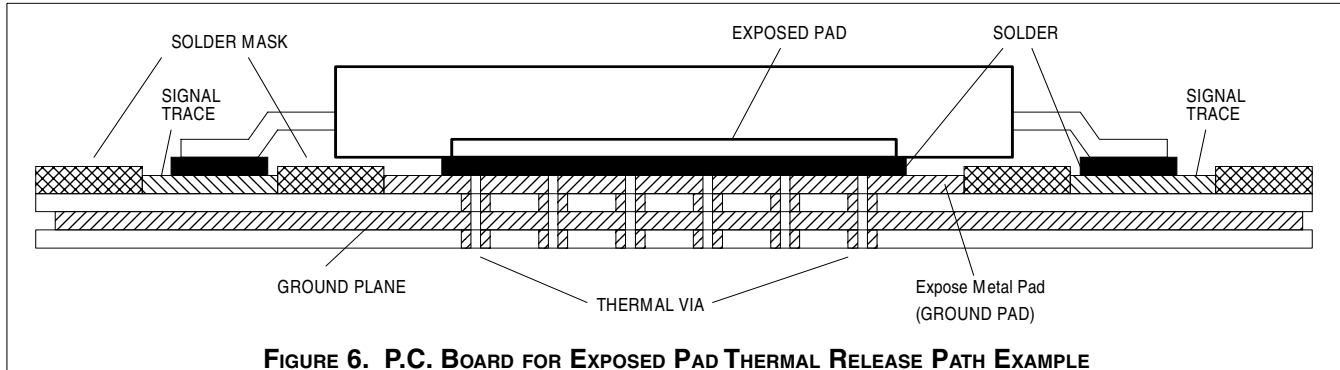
P.C. BOARD FOR EXPOSED PAD THERMAL RELEASE PATH EXAMPLE
